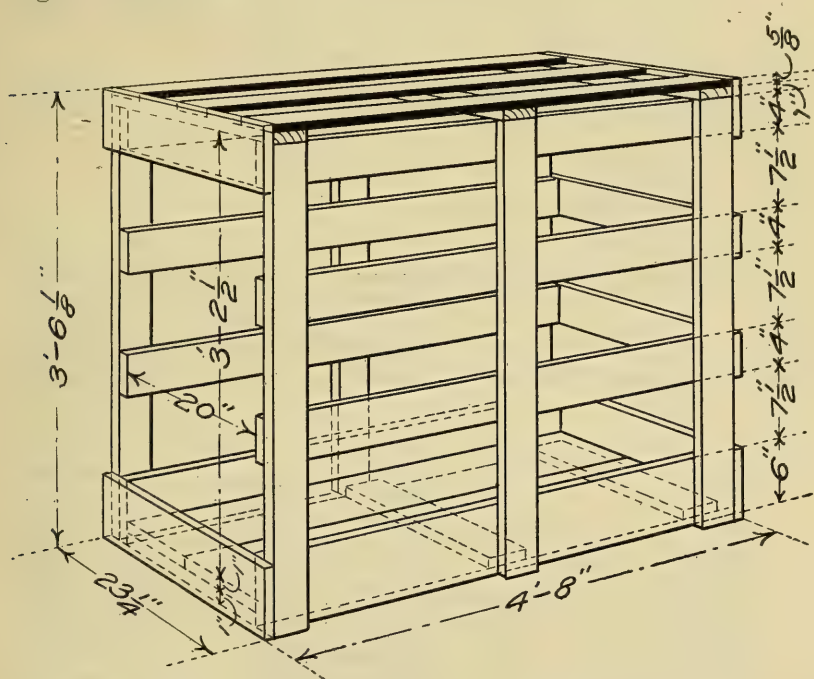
Showing dimensions of a crate similar to the one shown in Plate III, figure 1.
